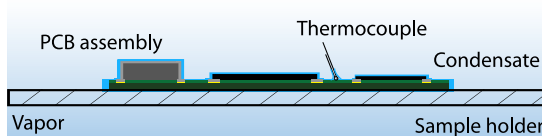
The filmwise condensate wets up the end of the thermocouple on the PCB assembly.
